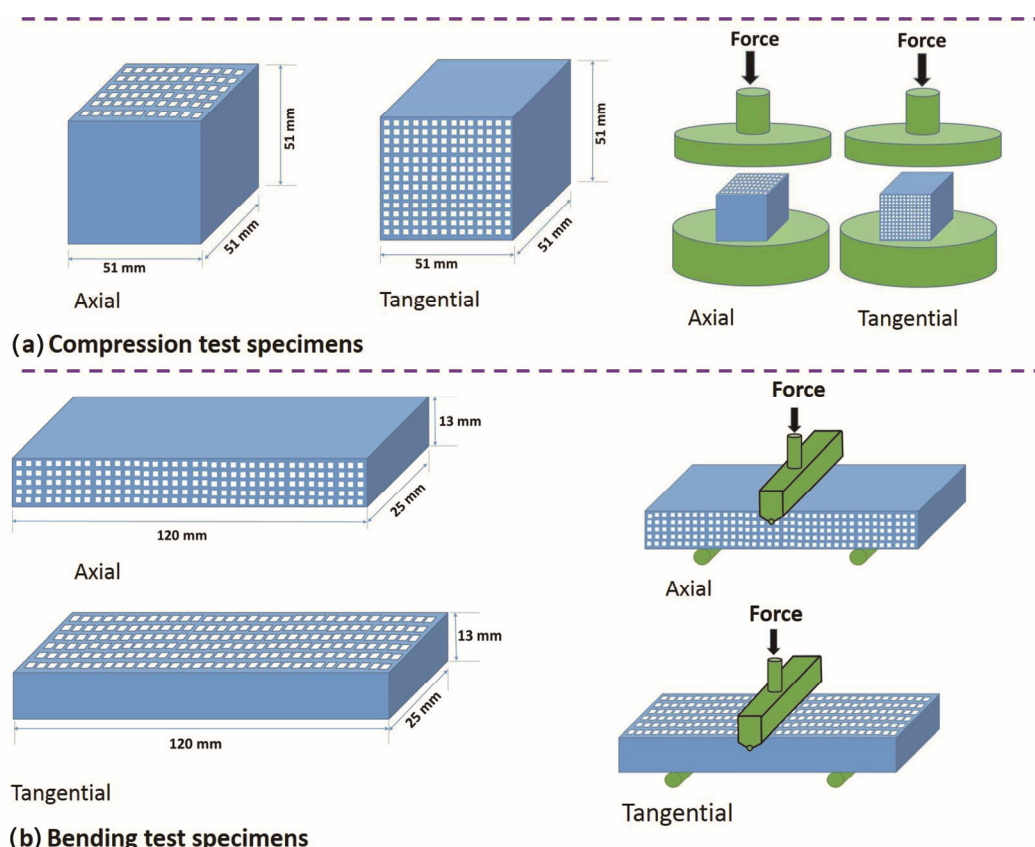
Geometry of the test specimens: (a) compressive and (b) bending test specimens.
